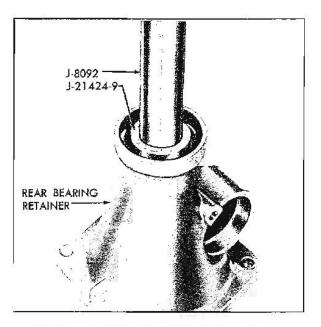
Installing Rear Bearing Retainer Bushing
